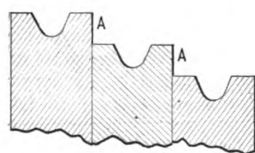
Broken View of Grooved Pulleys.—Scale, one-half full size.
